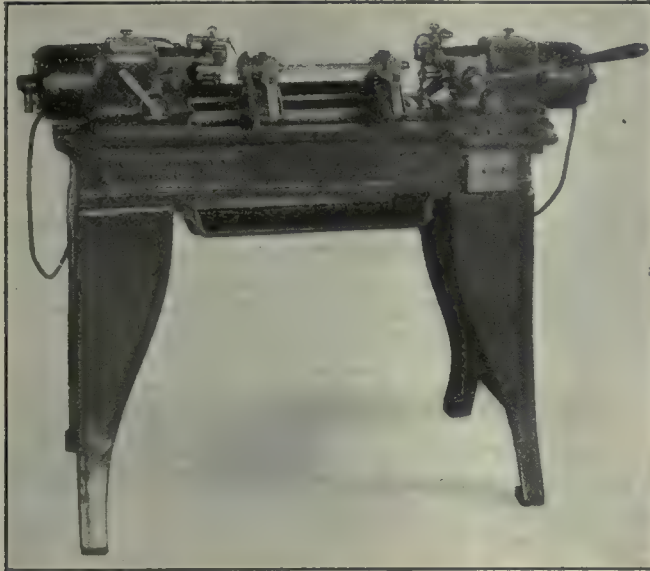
PRATT & WHITNEY HAND CENTERING MACHINE
